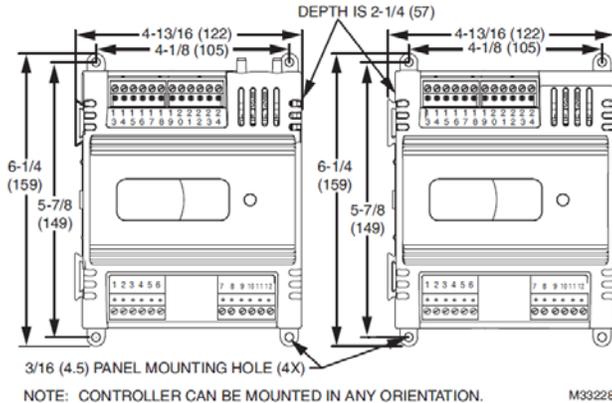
Panel mounting - controller dimensions in inches (mm) for CVB4024NS-VAV1 only
